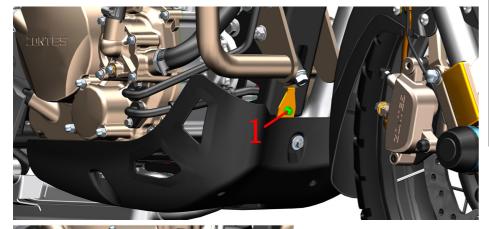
LOWER SHROUD		Lower shroud component 1	CHK	0
